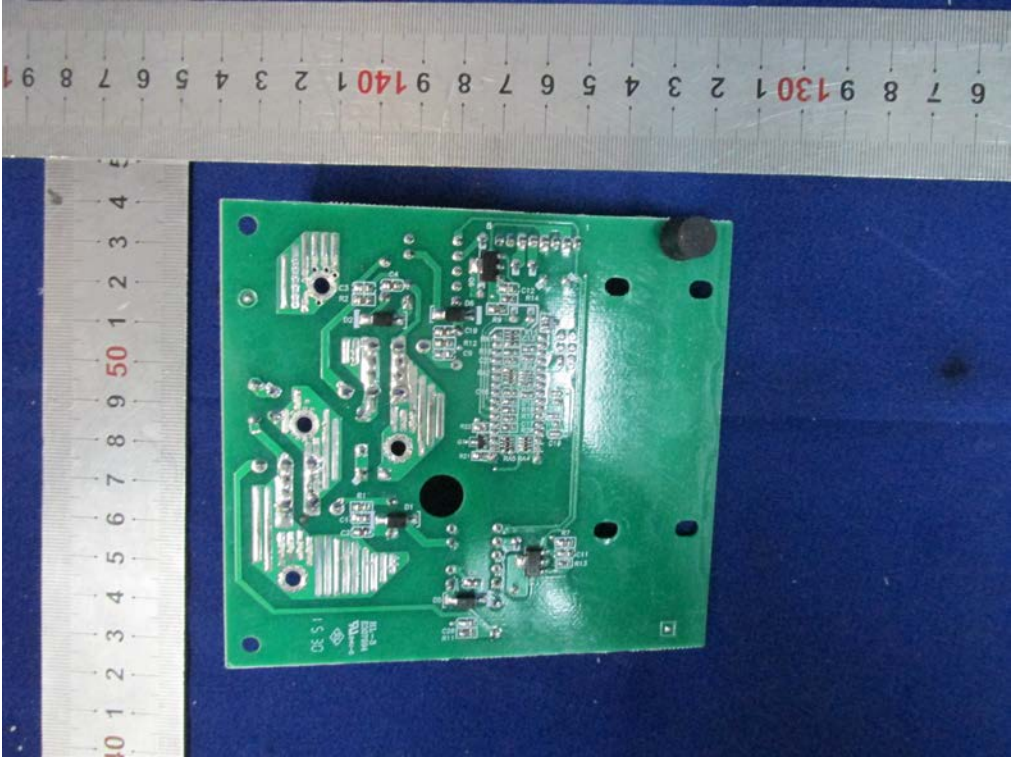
FlinInfini Lite 5kW-48V PCB of SCR board trace view
